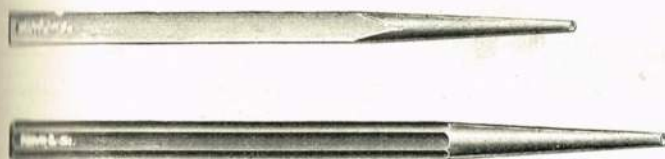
SOLID STEEL BEARING SCRAPERS.
